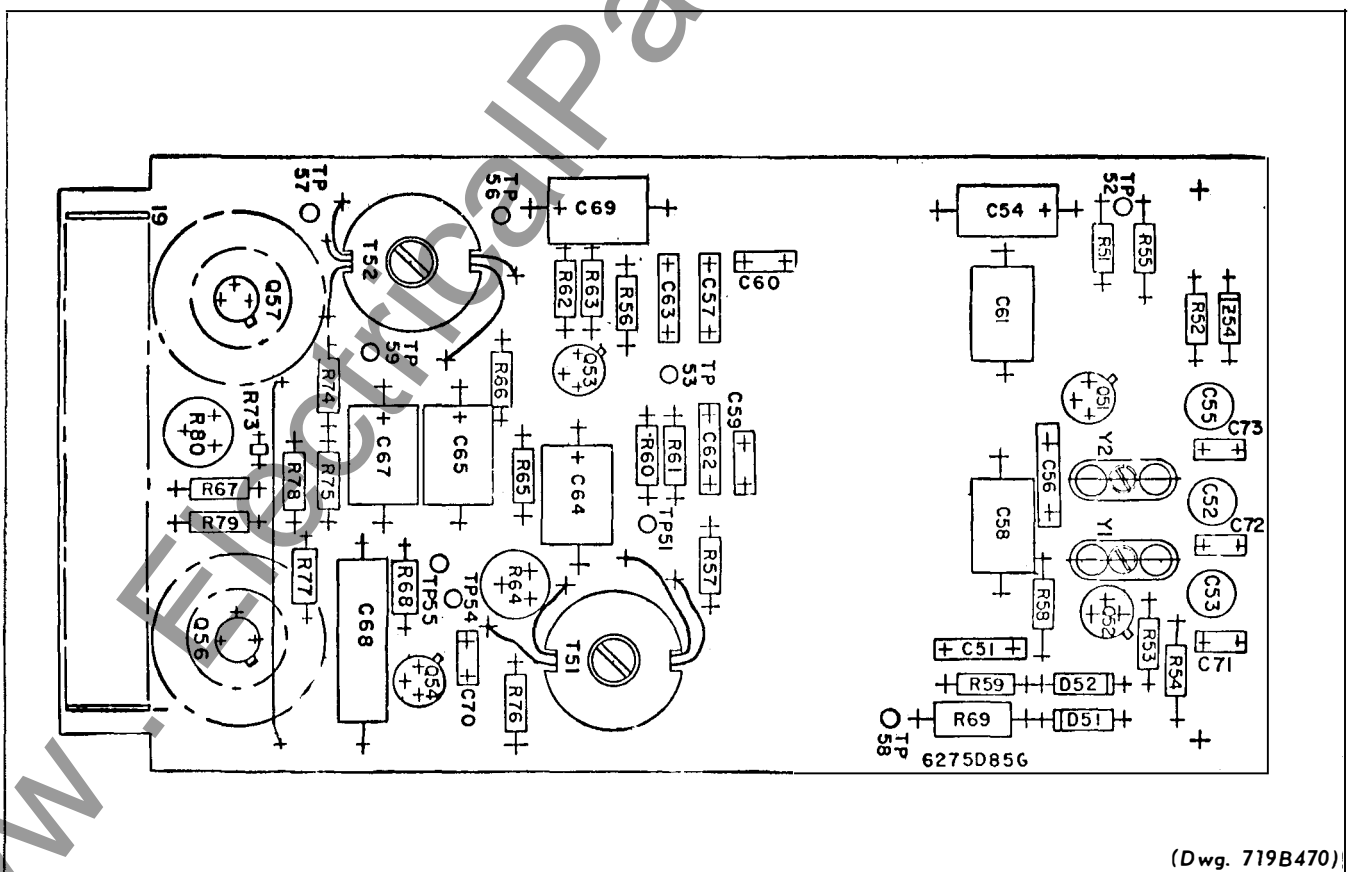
Component Locations of TCF Transmitter Circuit Board
